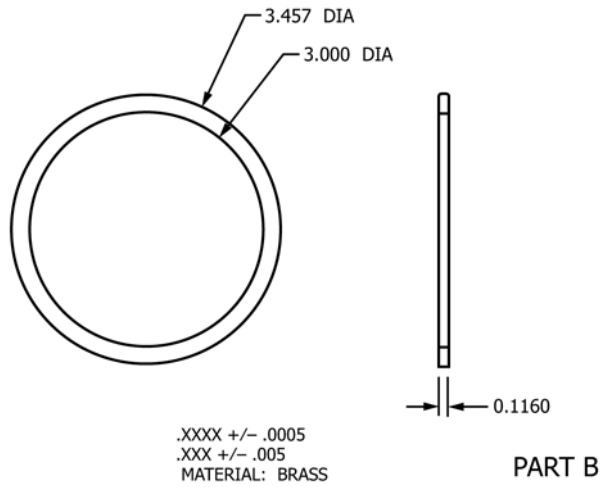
Part B, Pressure Ring for Outer Conductor
